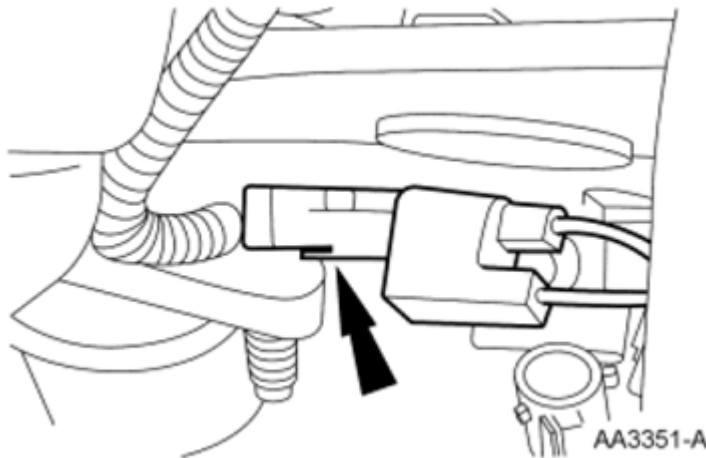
Locating Cylinder Head Temperature (CHT) Sensor Electrical Connector
